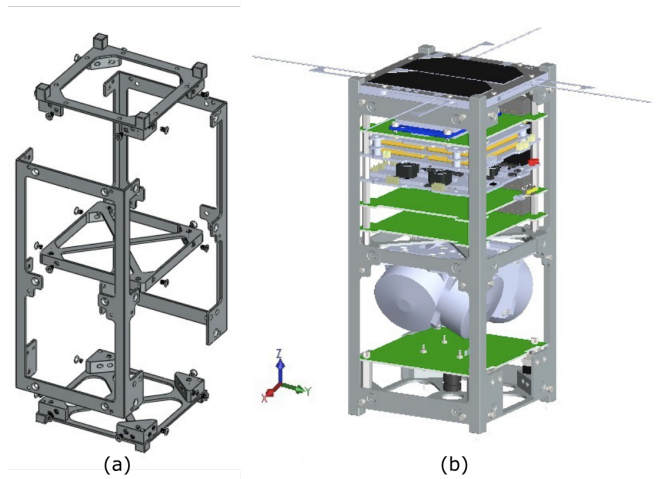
(a) SOC-i's chassis is comprised of five individually machined parts. (b) The internal configuration of components.
